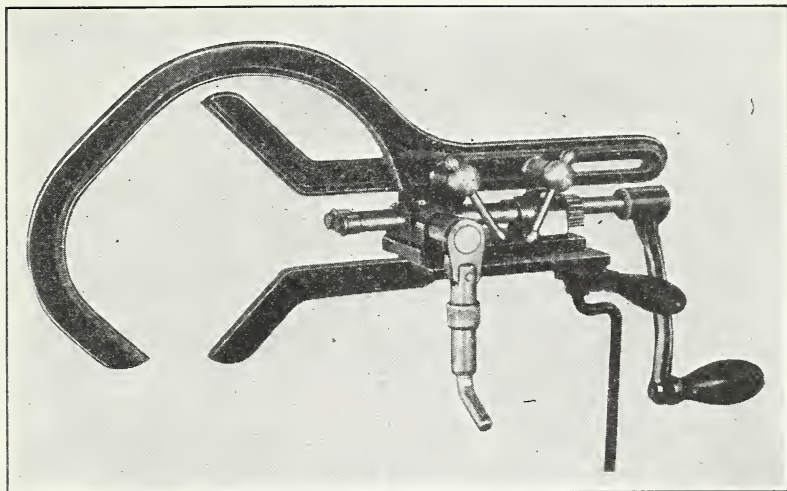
Roller device for straightening gin and linter saws used in cotton gins and cotton-oil mills.
